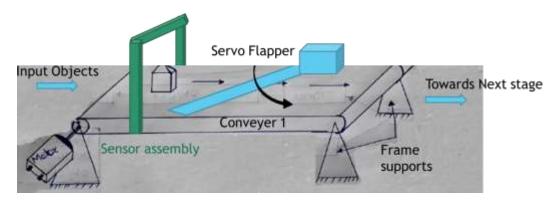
Mounting of Sensor Assembly and Servo Flapper
